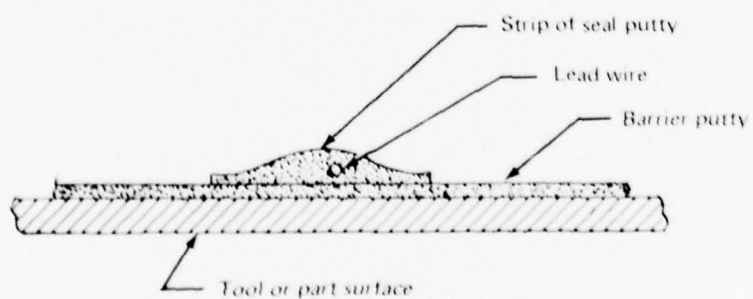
Use Strips of Putty to Seal Around Heater and Thermocouple Lead Wires
